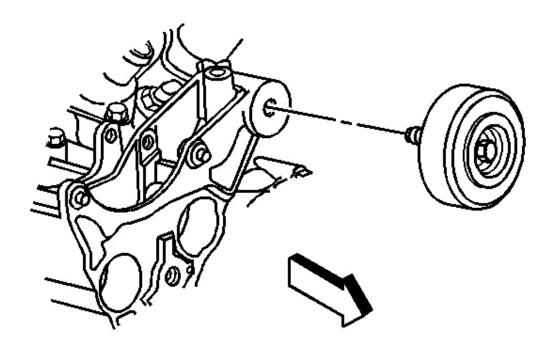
Drive Belt Right Idler Pulley Courtesy of GENERAL MOTORS CORP.
